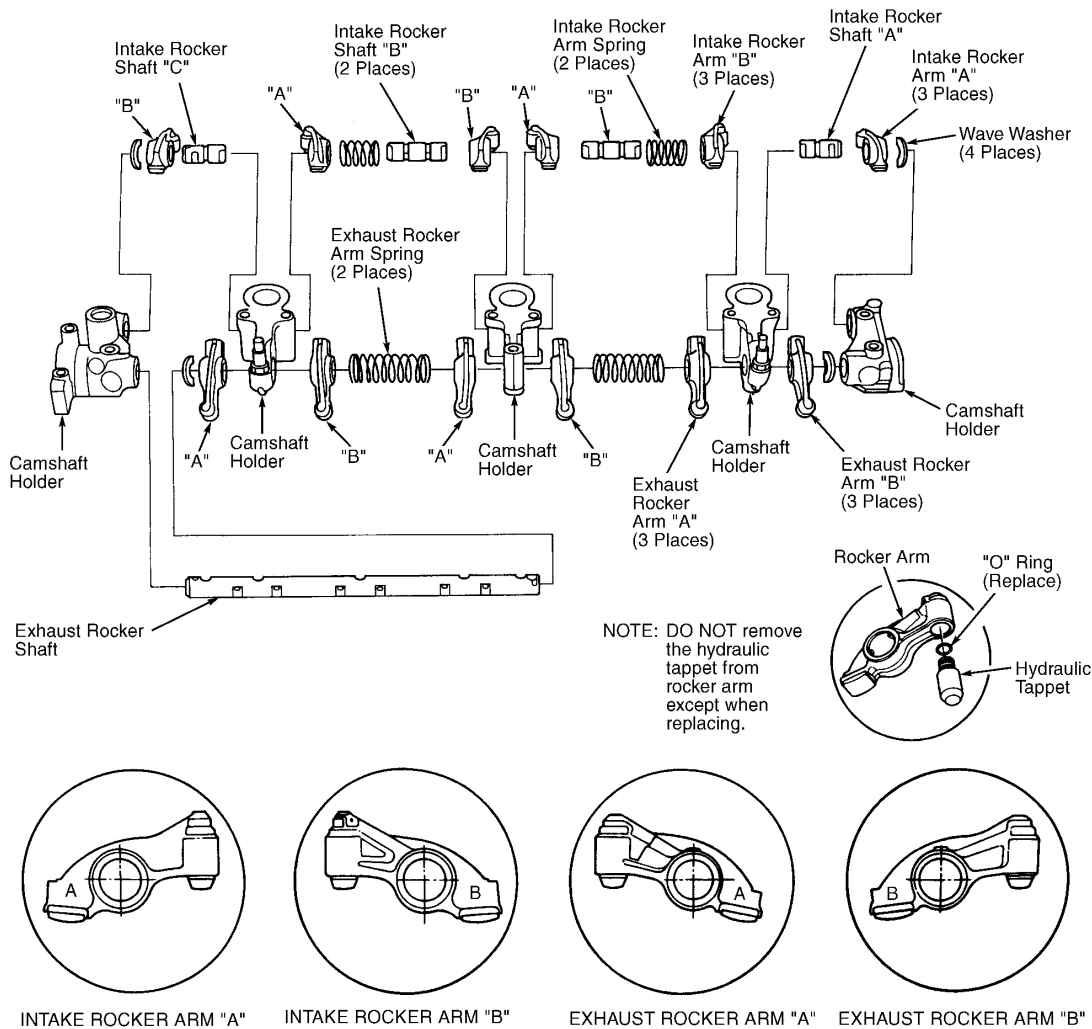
Exploded View Of Rocker Arm Assembly (USA Engine No. 1300001-1309262 & Canada Engine No. 1700001-1700751)
